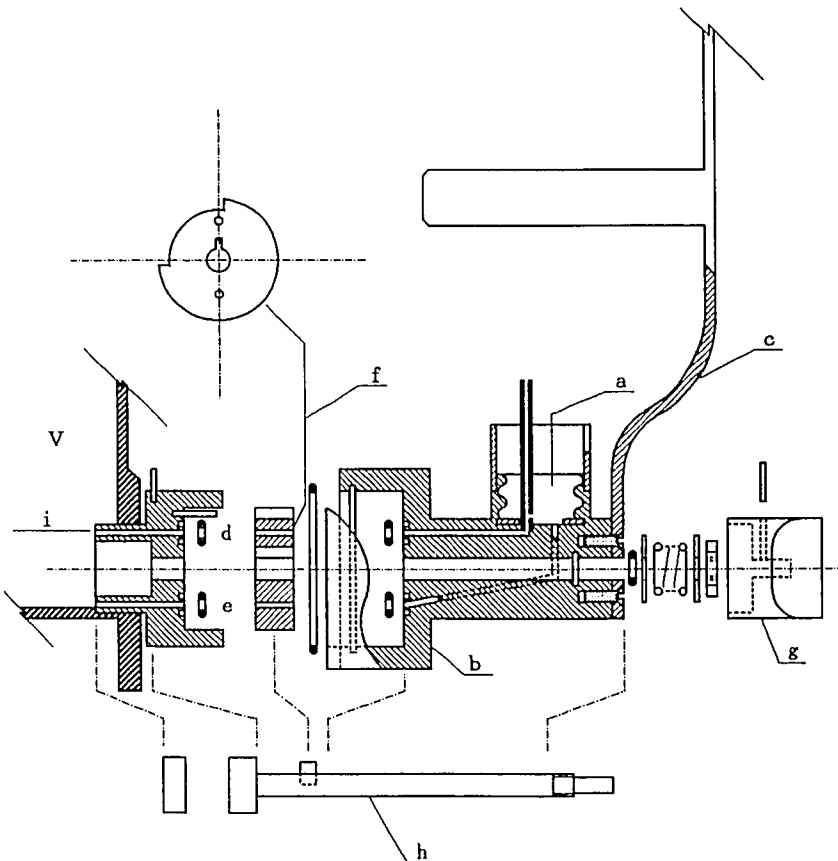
Schematic drawing of the device ("Open" and filling position). a-filling port with the keyed receptacle; b-rotary housing; c-protecting handle; d-air-passage; e-liquid-passage; f-rotary valve; g-knob for the rotary valve; h-shaft for the rotary valve; i-maximum level of liquid filling; V-vaporizer.
